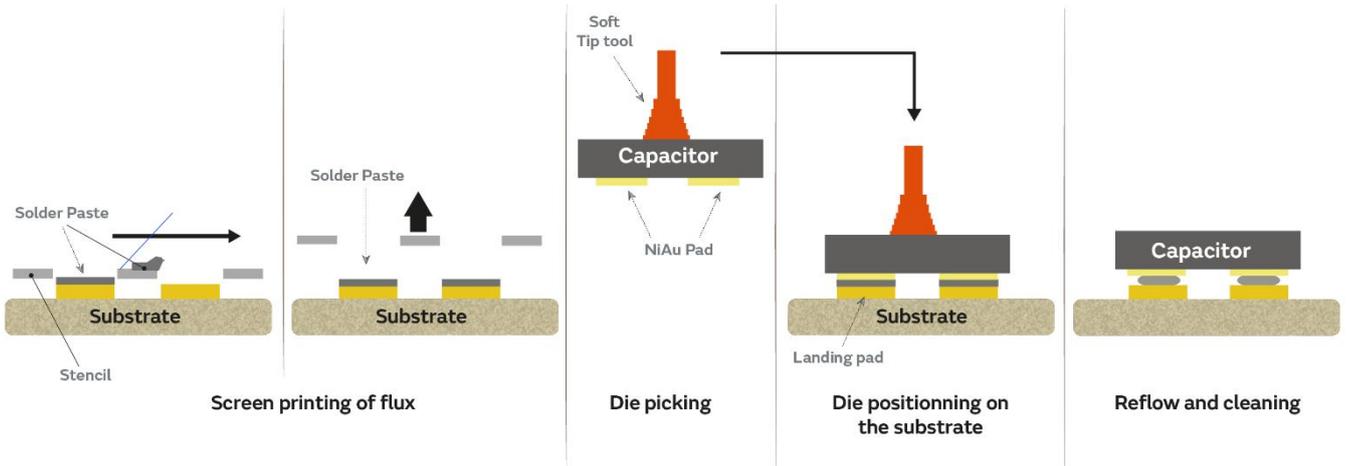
Assembly process by screen printing of solder paste on silicon capacitor
